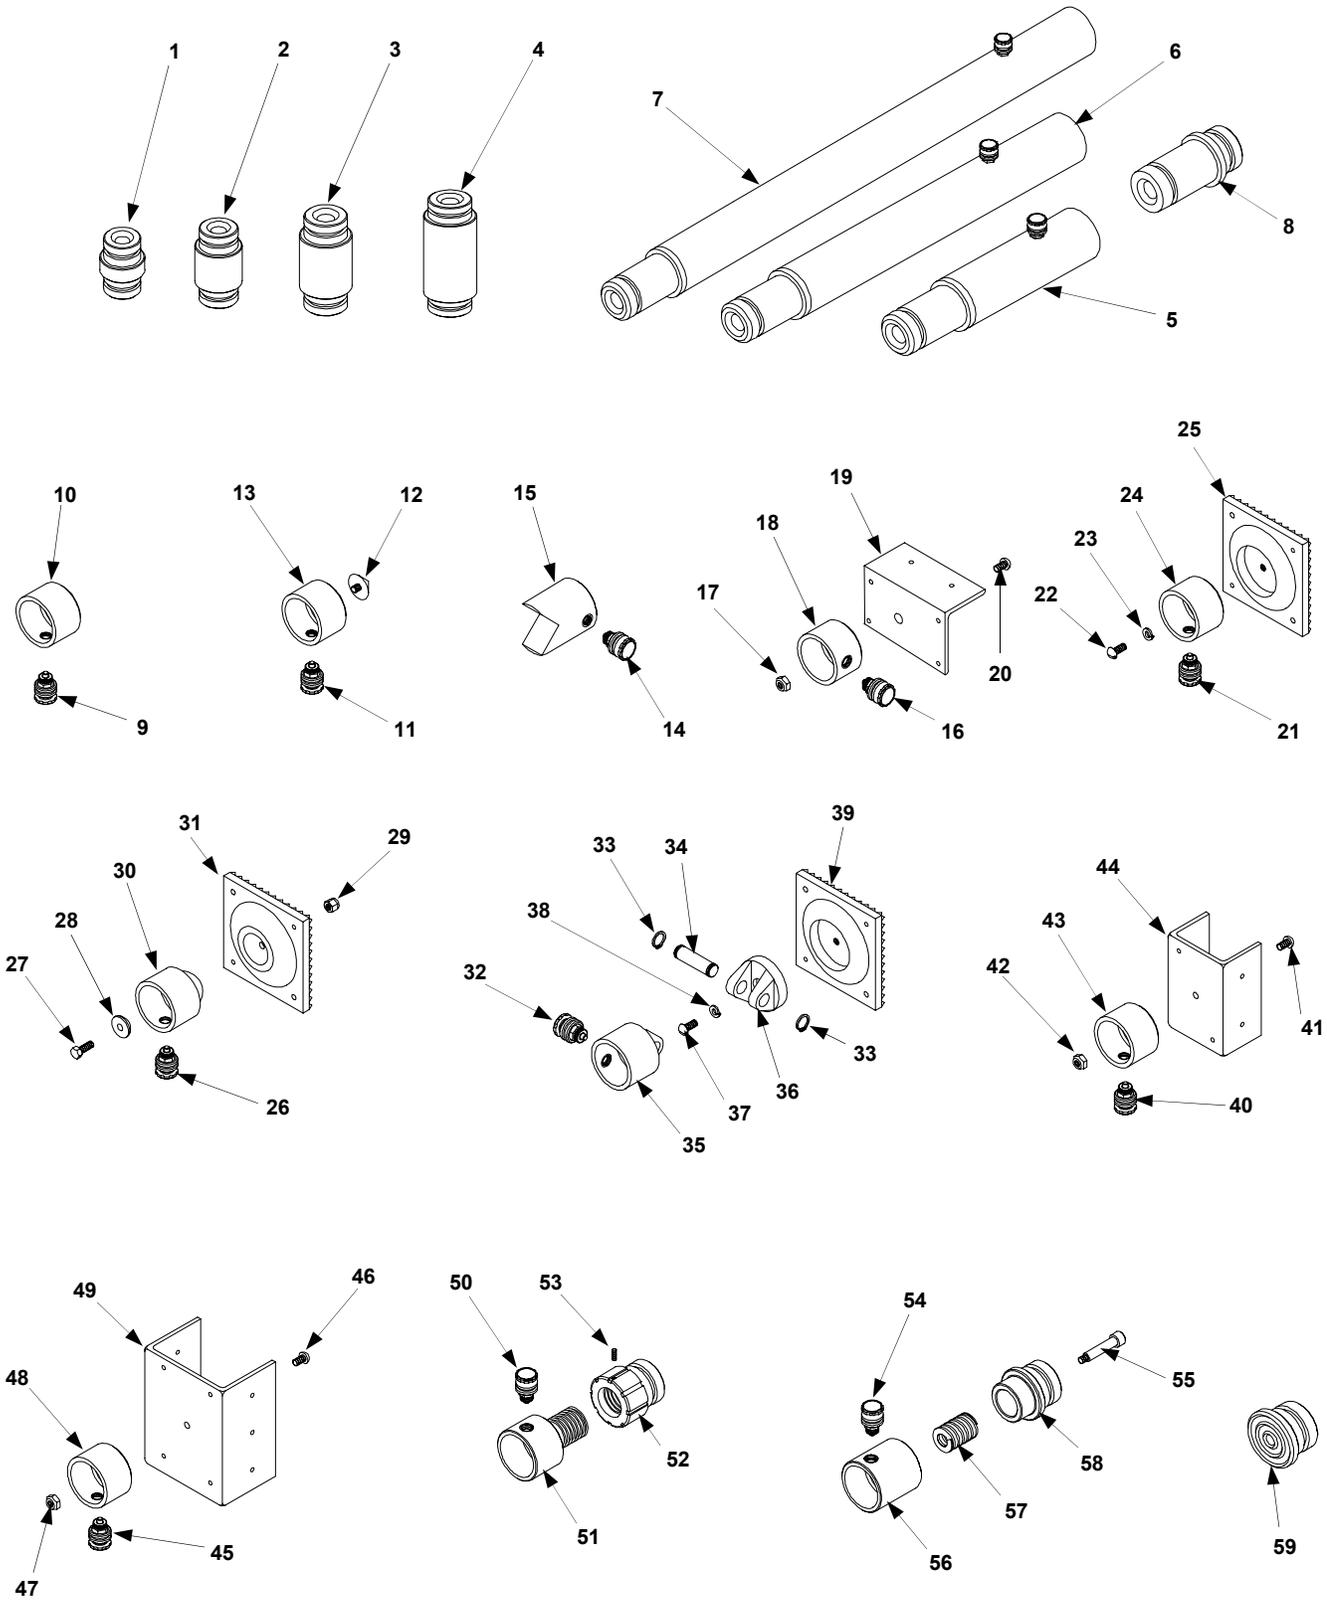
Low Clearance Supports, Extensions, Base Plates and Connectors
